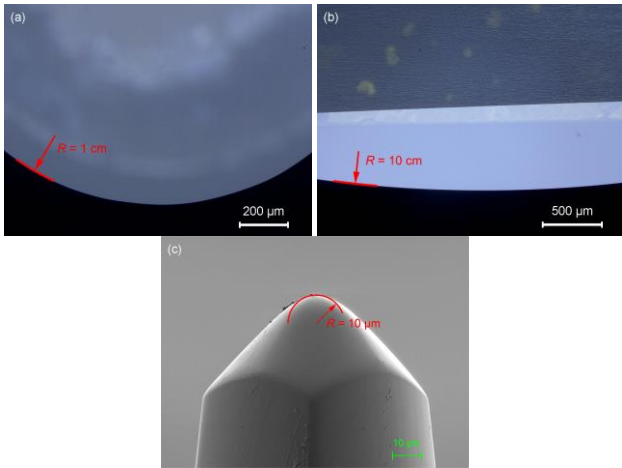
Optical microscope images of (a) R1 tool, and (b) R10 tool. (c) SEM image of spherical tool.
